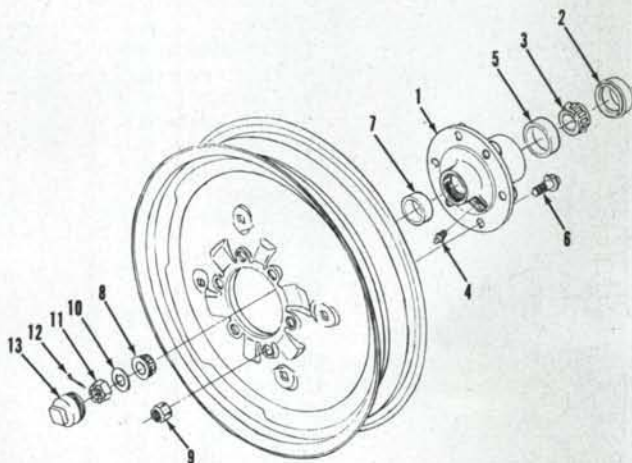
Exploded view of front wheel hub used on two-wheel-drive models.
